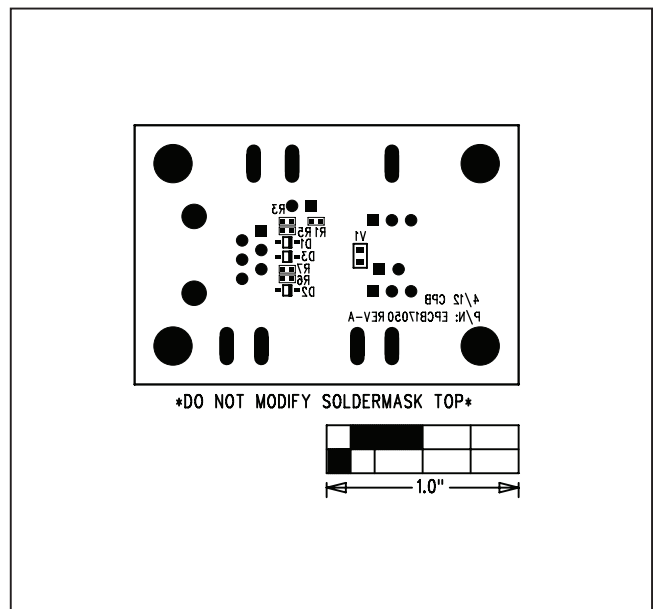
MAX17050 EV Kit Component Placement Guide—Solder Side
